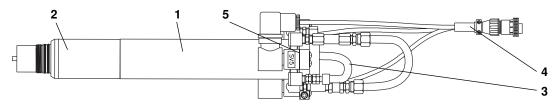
A HT2000LHF Stainless Steel Torch Assembly with Valve Cluster
